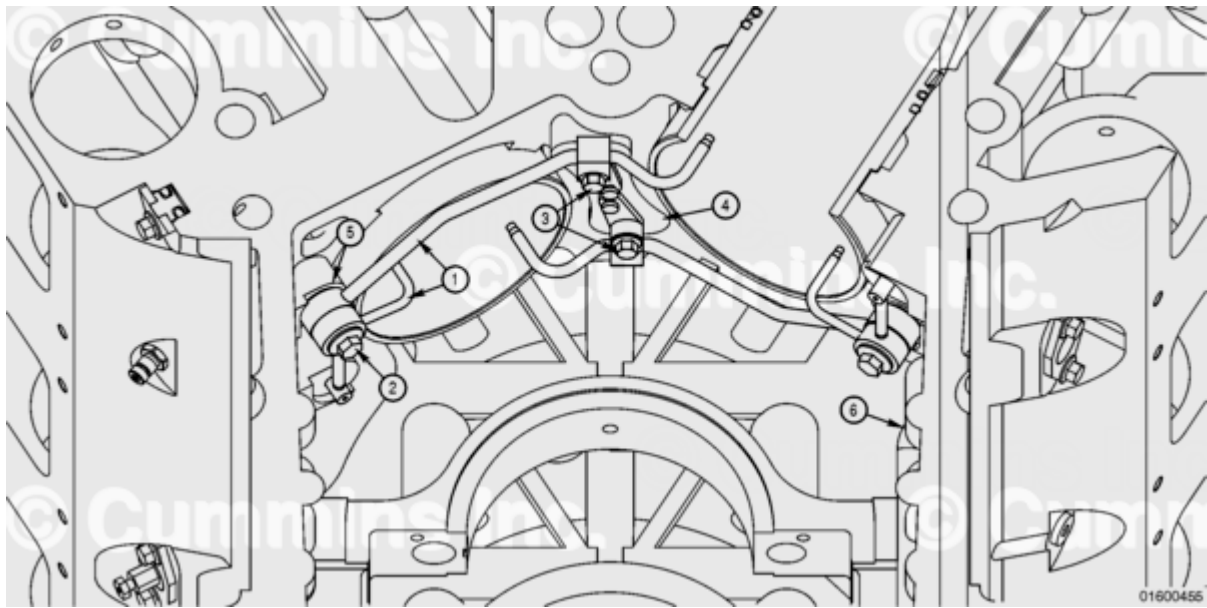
Overview of Machining and New Requirements for Upgrade (1) New Piston Cooling Nozzles, (2) New Piston Cooling Nozzle Banjo Bolt, (3) New Piston Cooling Nozzle Center Bolt, (4) Machined Upper Piston Cooling Nozzle Mounting Pad, (5) Machined Lower Piston Cooling Nozzle Mounting Pad - two locations, (6) Machined Side Wall Block - two locations.
